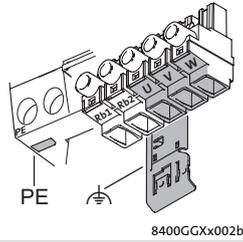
Removal of the contact screws for device sizes 1 ... 3 (on the supply side and on the motor side)
